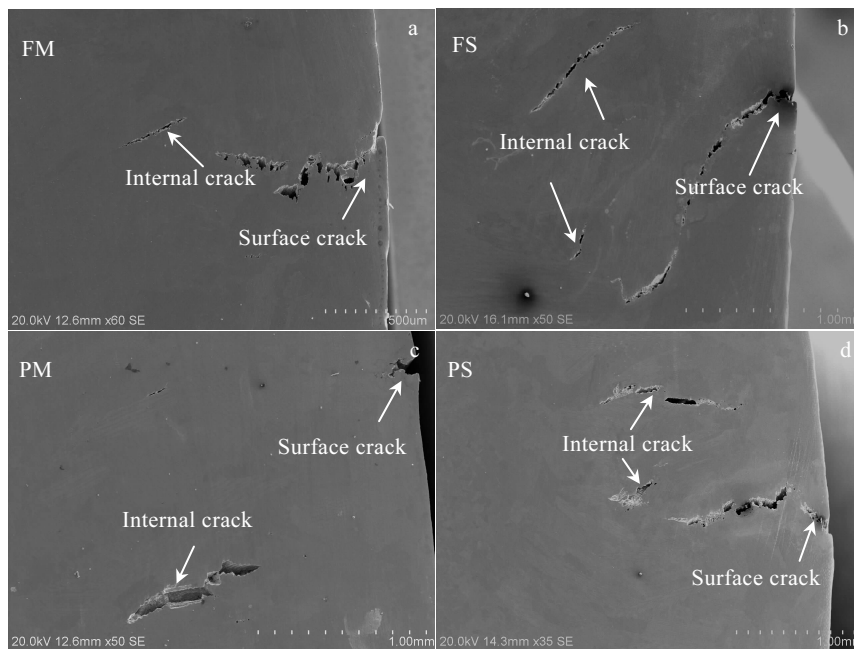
Cracking section of the samples FM (a), FS (b), PM (c) and PS (d)
